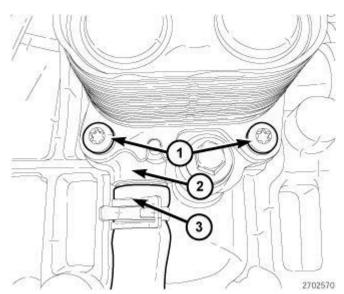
Coolant Hose, Oil Cooler Housing & Bolts Courtesy of CHRYSLER LLC
